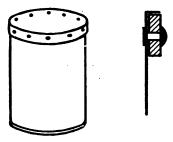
Sheet Metal Can and Method of Riveting Band Iron to the Top Edge.
